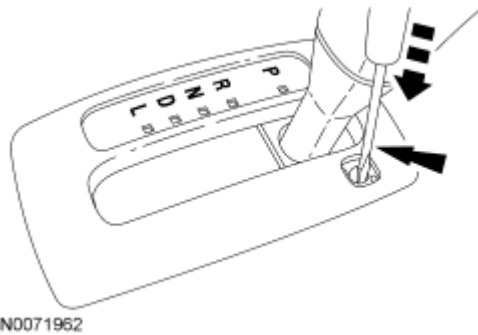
Depressing Brake Shift Interlock Override Mechanism On Selector Lever Using An Suitable Tool
